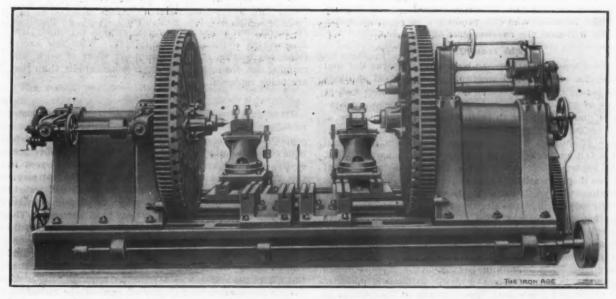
Rear View, Showing Boring Attachment Drive Shaft.
